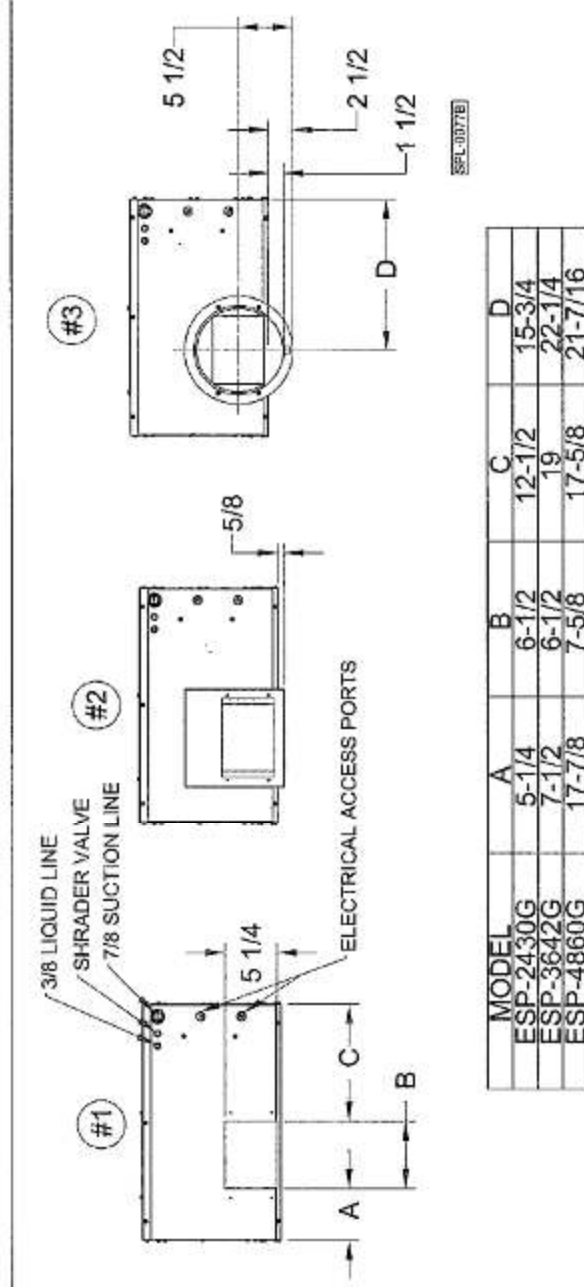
CONNECTION LOCATIONS AND ASSEMBLED PLENUM ADAPTOR DIMENSIONS
